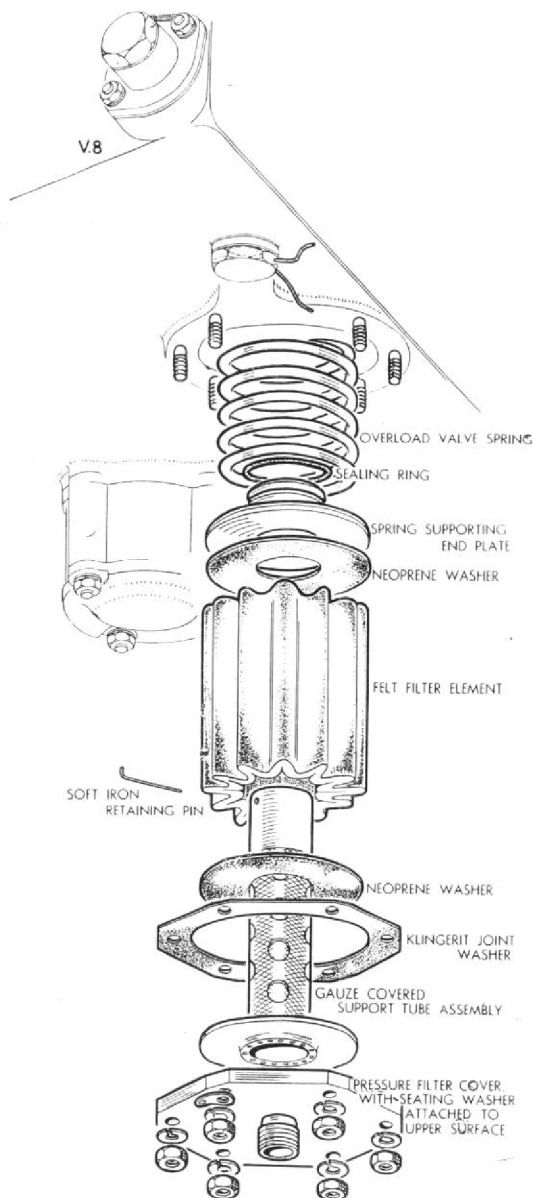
Oil pressure filter assembly, with mod. 749 embodied.
